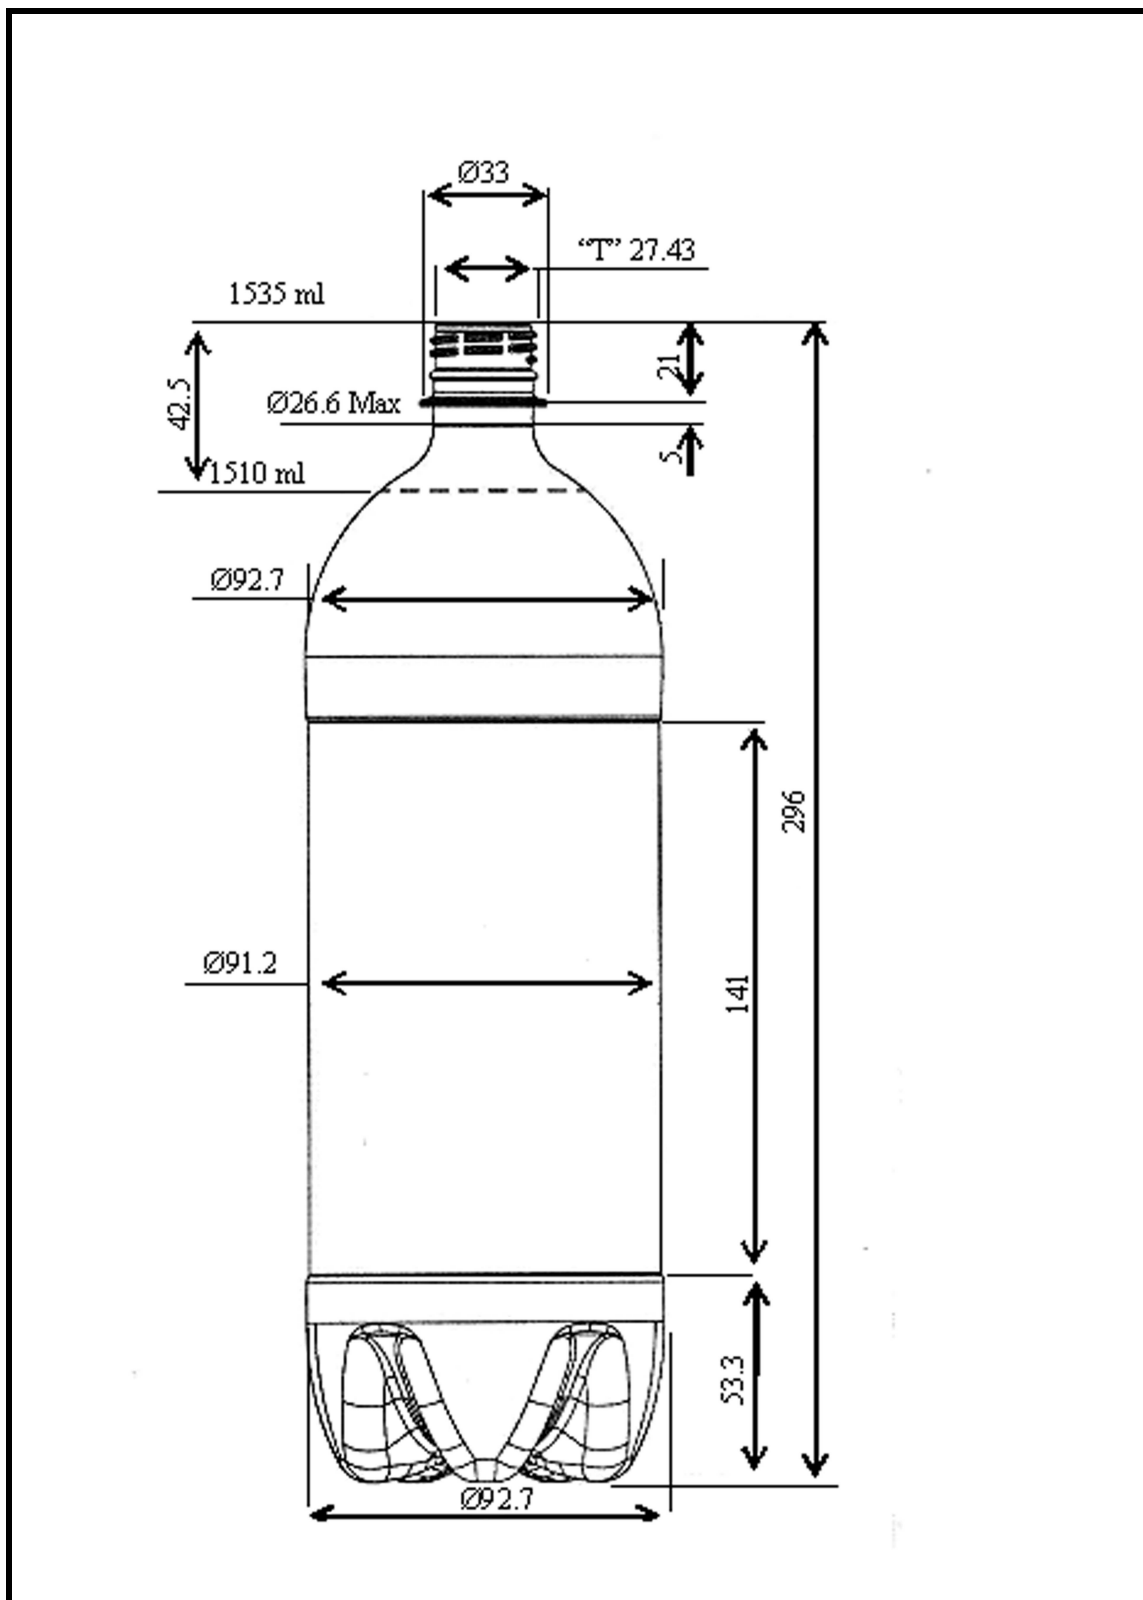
1500 ml PET bottle drawing and dimensions
